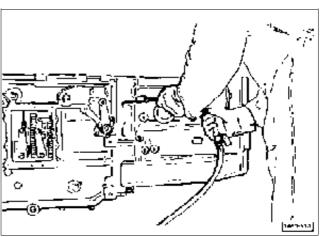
Secure the housing, torquing the bolts to 12 kgm.
